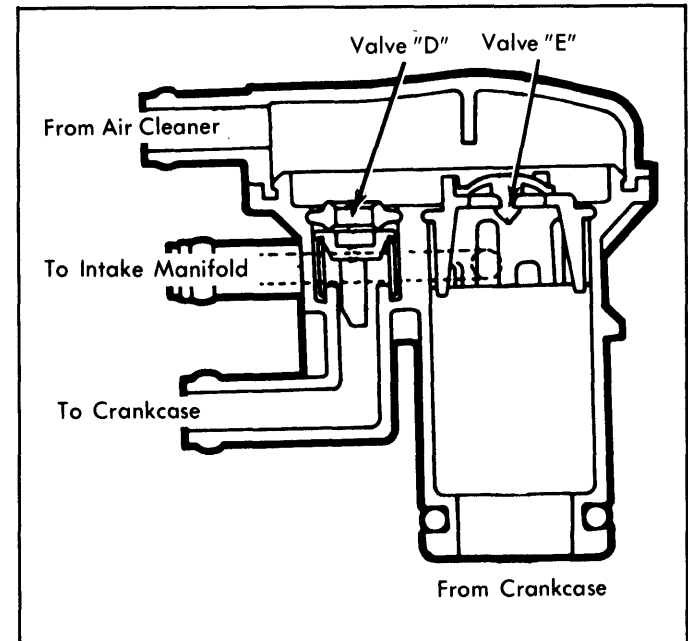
Fiesta Crankcase Ventilation Valve Assembly
